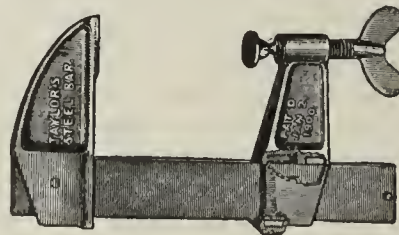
The Taylor Steel Bar Screw Clamp No. 20.
